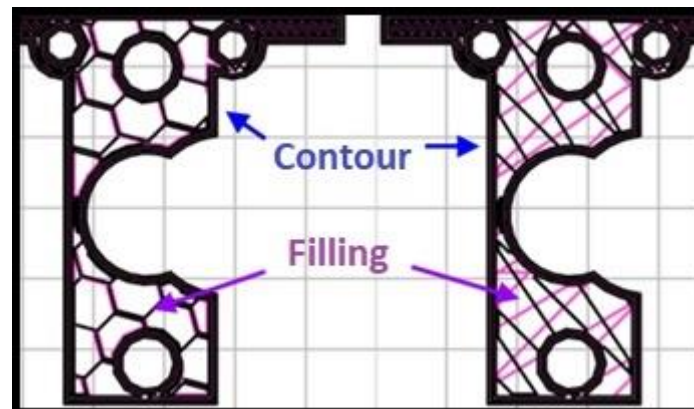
Section of a piece printed with two types of fill patterns. Left: honeycomb, Right: linear.
